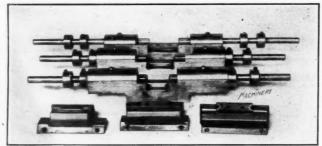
Punches and Punch-plates for making Different sized Terminals
